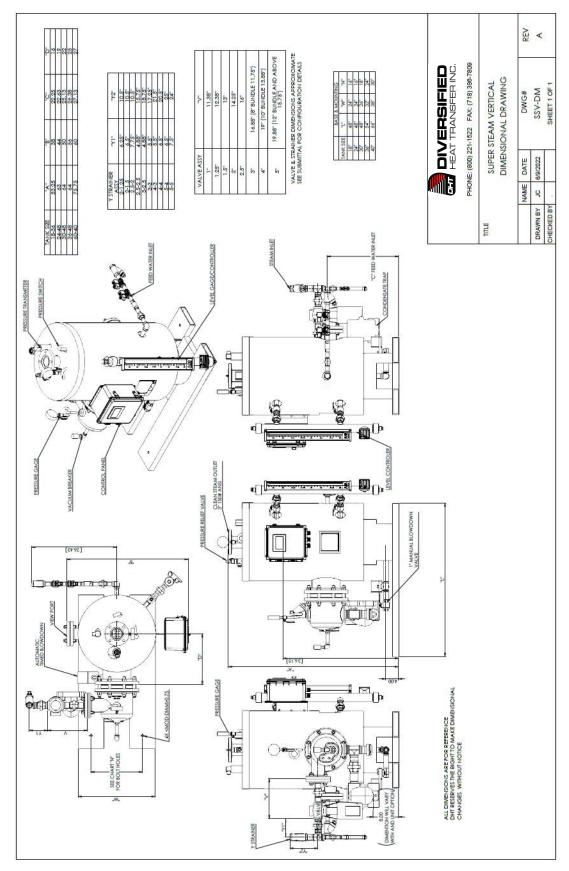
SS SERIES VERTICAL UNITS DIMENSIONAL DRAWING
